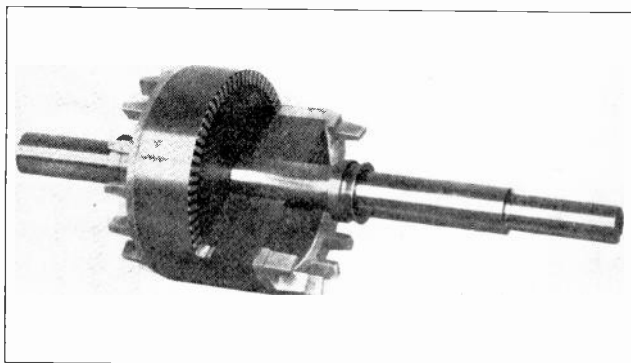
This view shows a sectional view of a squirrel-cage rotor for an A.C. induction motor. Note the manner in which the copper bars are imbedded in the surface of the core.
